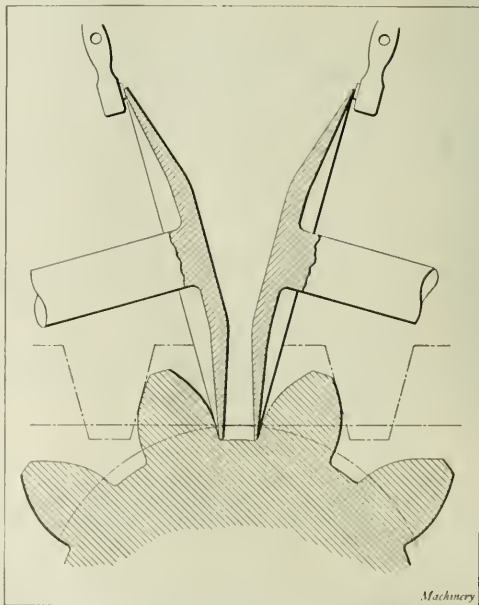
Operating Principle of the Maag Gear-grinding Machine
